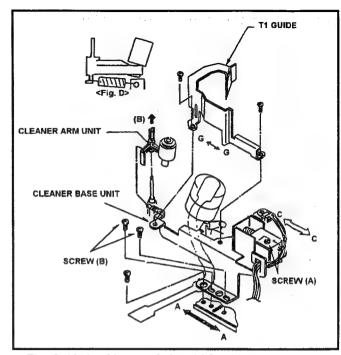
Cleaner Solenoid Position Adjustment
